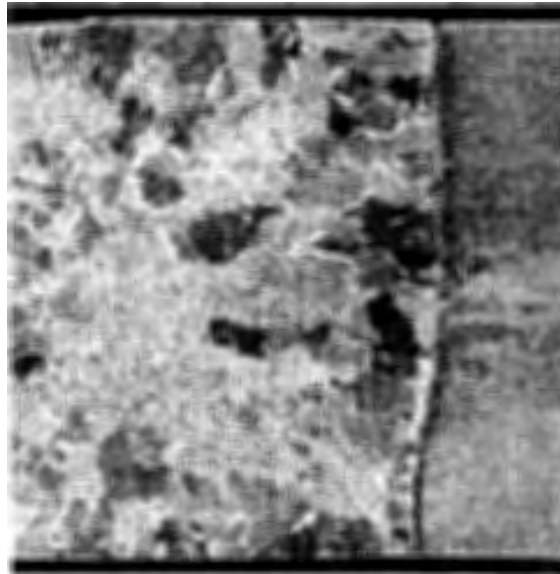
Incomplete fusion resulting from improper guide tube position nearer one side of the weld joint with otherwise proper welding conditions.
